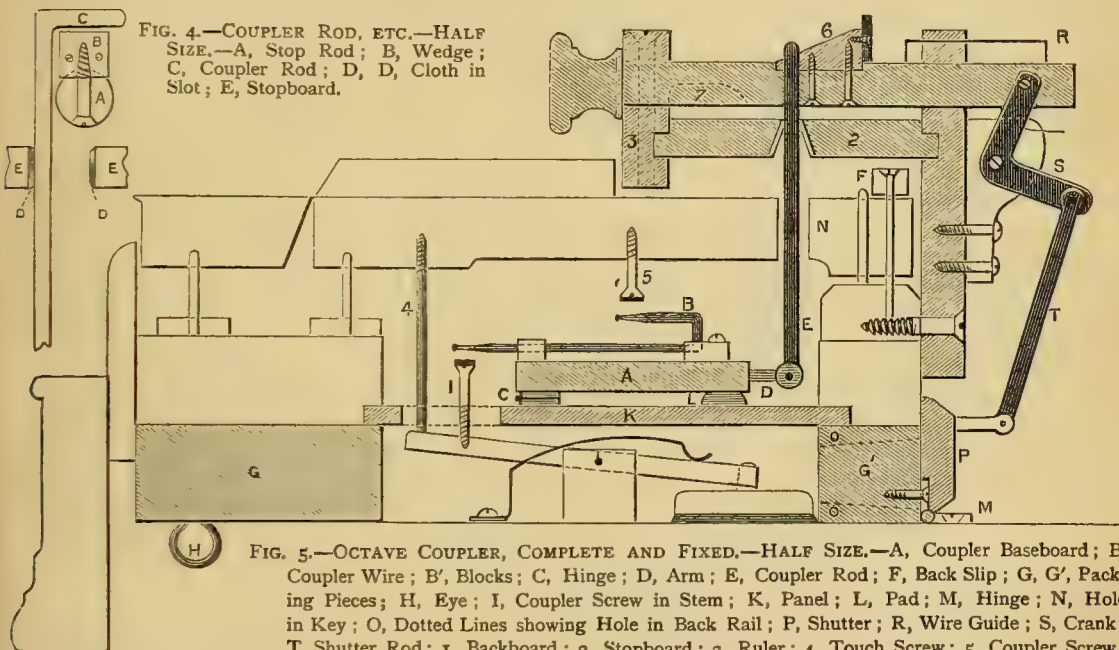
OCTAVE COUPLER, COMPLETE AND FIXED.—HALF SIZE.—A, Coupler Baseboard; B, Coupler Wire; B', Blocks; C, Hinge; D, Arm; E, Coupler Rod; F, Back Slip; G, G', Packing Pieces; H, Eye; I, Coupler Screw in Stem; K, Panel; L, Pad; M, Hinge; N, Hole in Key; O, Dotted Lines showing Hole in Back Rail; P, Shutter; R, Wire Guide; S, Crank; T, Shutter Rod; x, Backboard; 2, Stopboard; 3, Ruler; 4, Touch Screw; 5, Coupler Screw;
